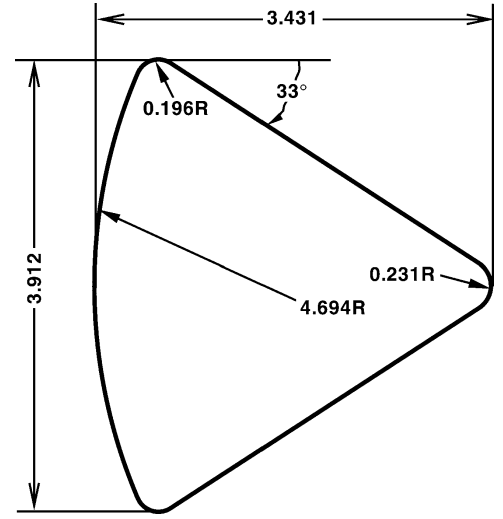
Schematic drawing of the outer mold line of AS-202 capsule as modeled in this work. All dimensions in meters.
